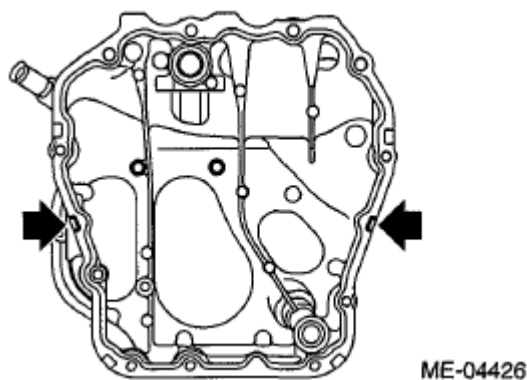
Locating Flat Tip Screwdriver Inserting Location
